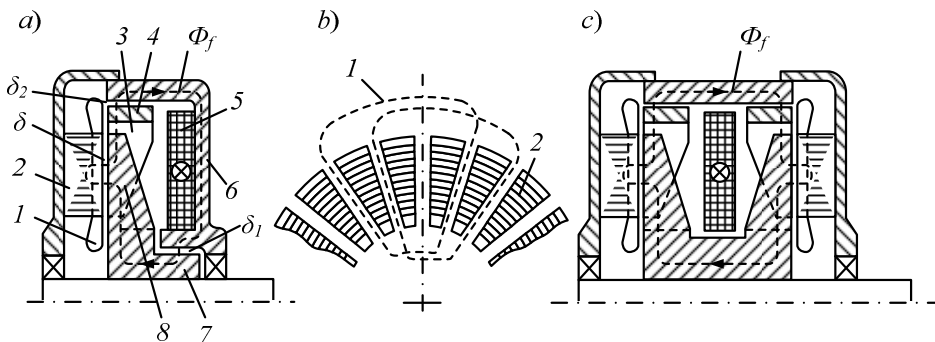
Frontal single-package (a, b) and two package brushless machines
